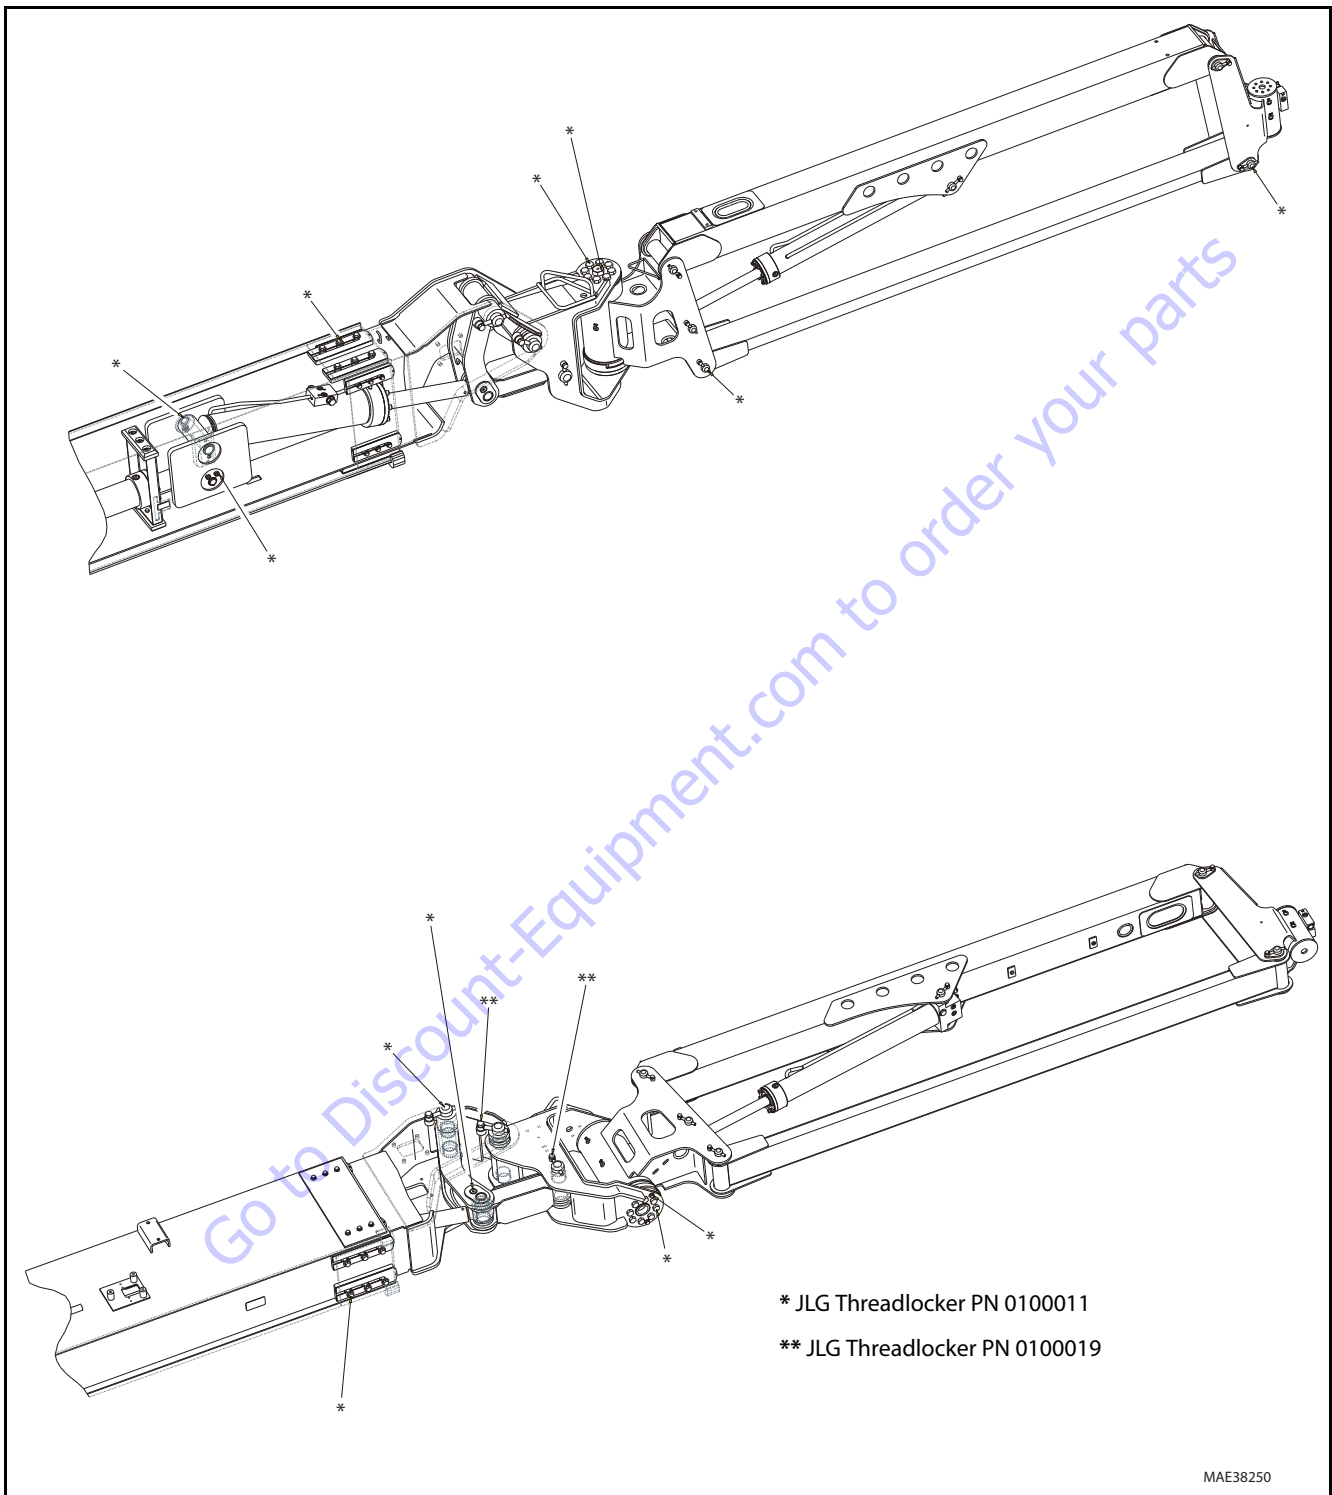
Locations for JLG Threadlocker Application - Sheet 1 of 5
